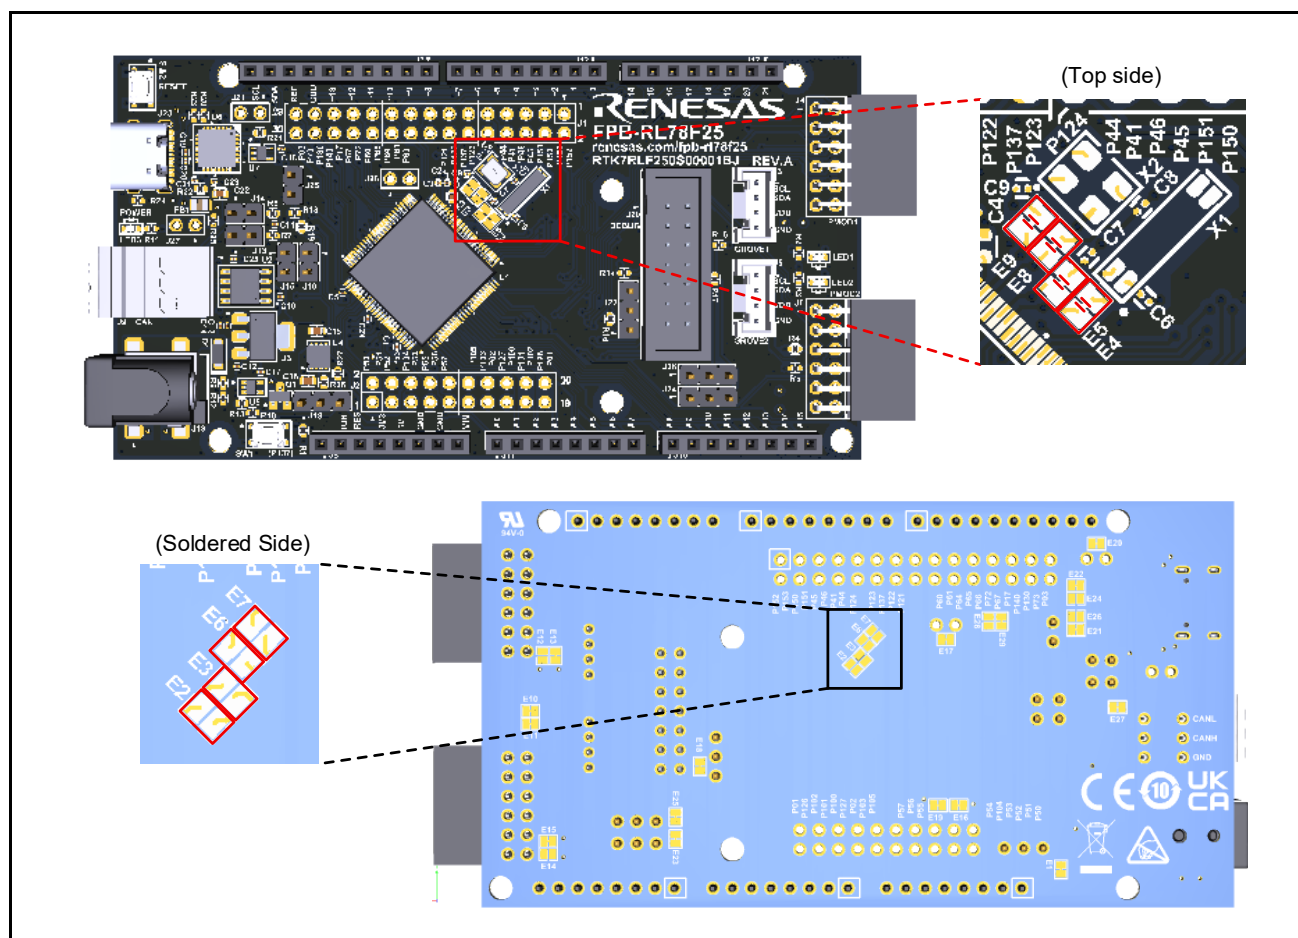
Assignments of Jumper Solder (E2 to E9)
